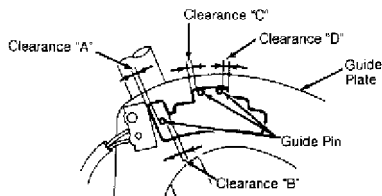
Checking Gearshift Lever Adjustment Clearances
